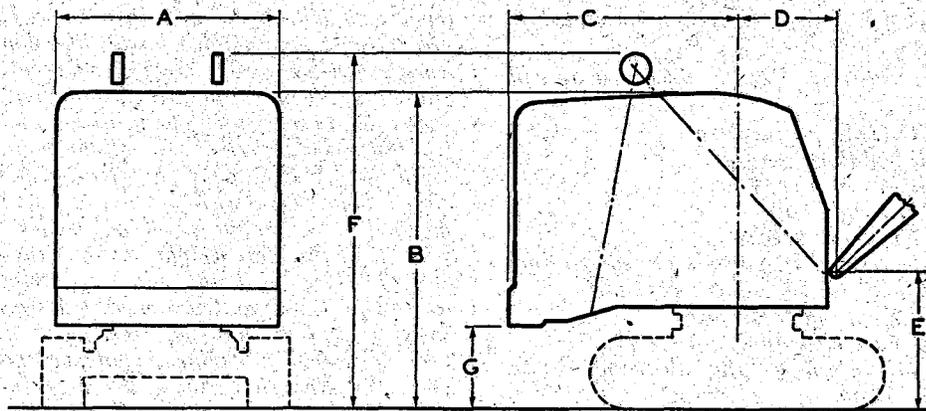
Cab dimensions, crawler mounting (paragraph 4.16).
